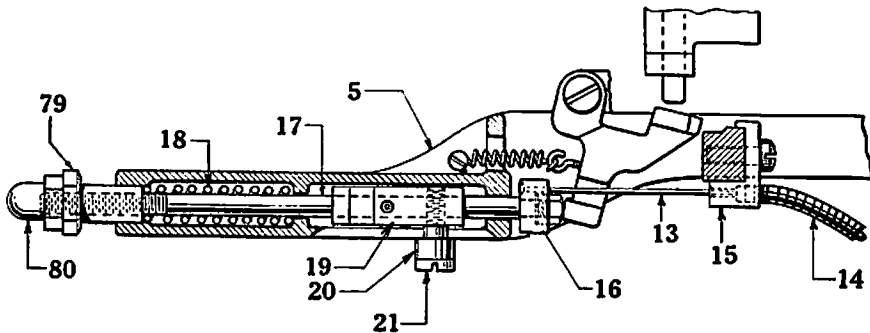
Top Sectional View of Right-Hand Magazine Lifting Lever 5. This lever releases the magazine carriage catch and the channel entrance latch when cable 13 pulls rod 17 toward the back of the machine.
